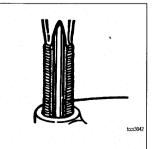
Using the kit, tap the hole in order to receive the thread insert. Keep the tap well oiled and back it out frequently to avoid clogging the threads
